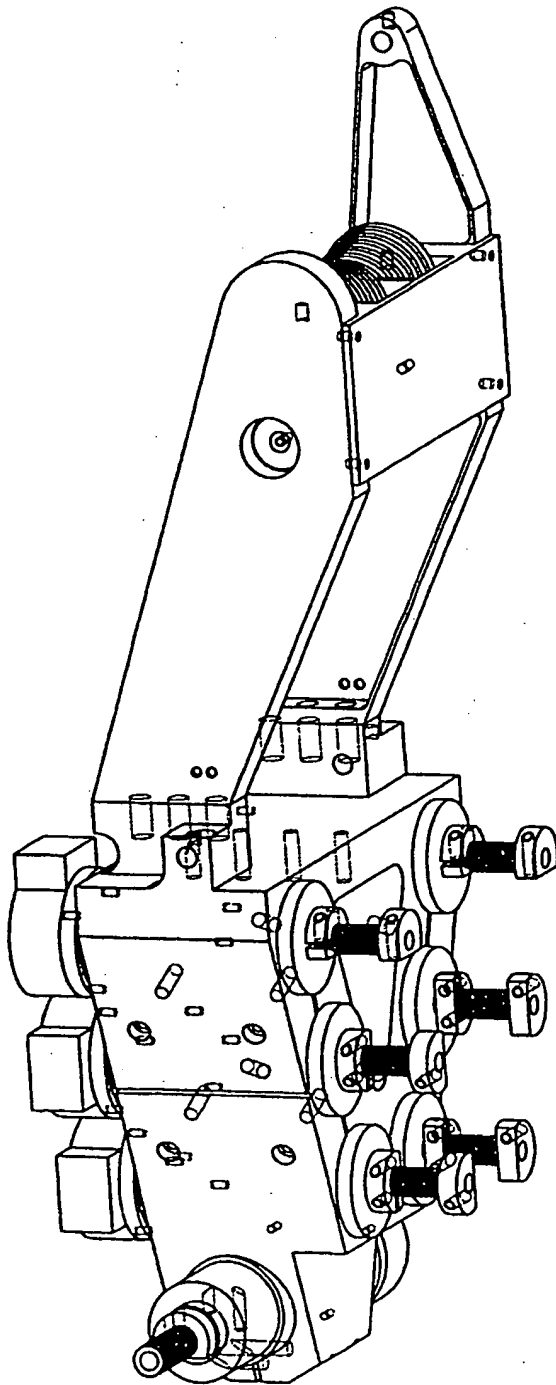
Link 1 clamps 7 of the 8 motors in a block machined from a single piece of aluminum. A triangular water-cooled counterweight fits into this piece. Two vertical uprights and a pulley support piece form the remainder of the structure. Each motor is fitted with a threaded cable drive capstan.
